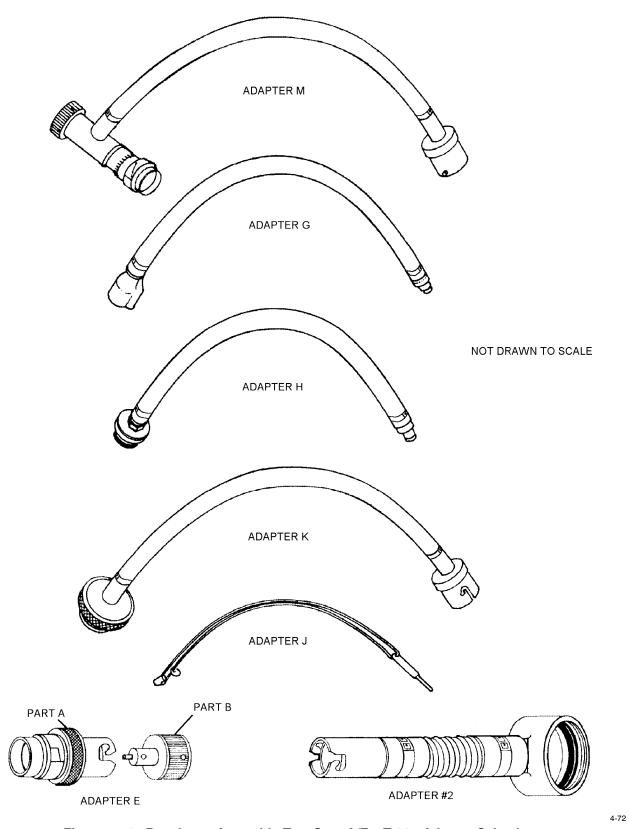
Respirator Assembly Test Set - A/E47T-28 - Adapter Selection
